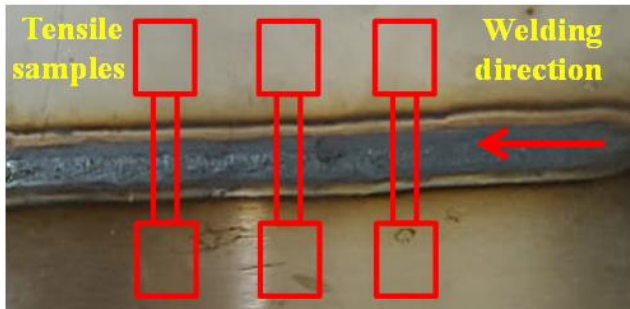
Schematic illustration for the cut tensile test specimens for the welding joints of stainless steels 304 and 304L
